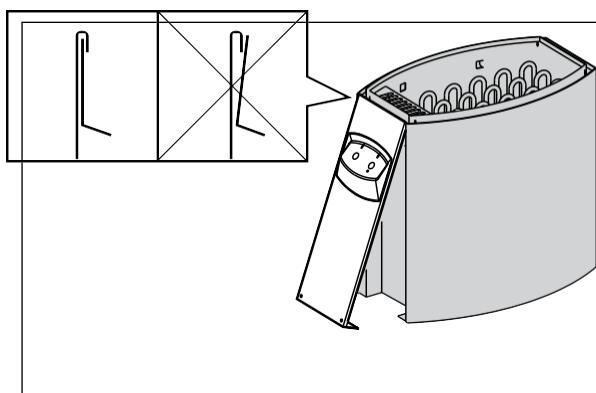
Closing the cover of the connection box (all dimensions in millimeters)
